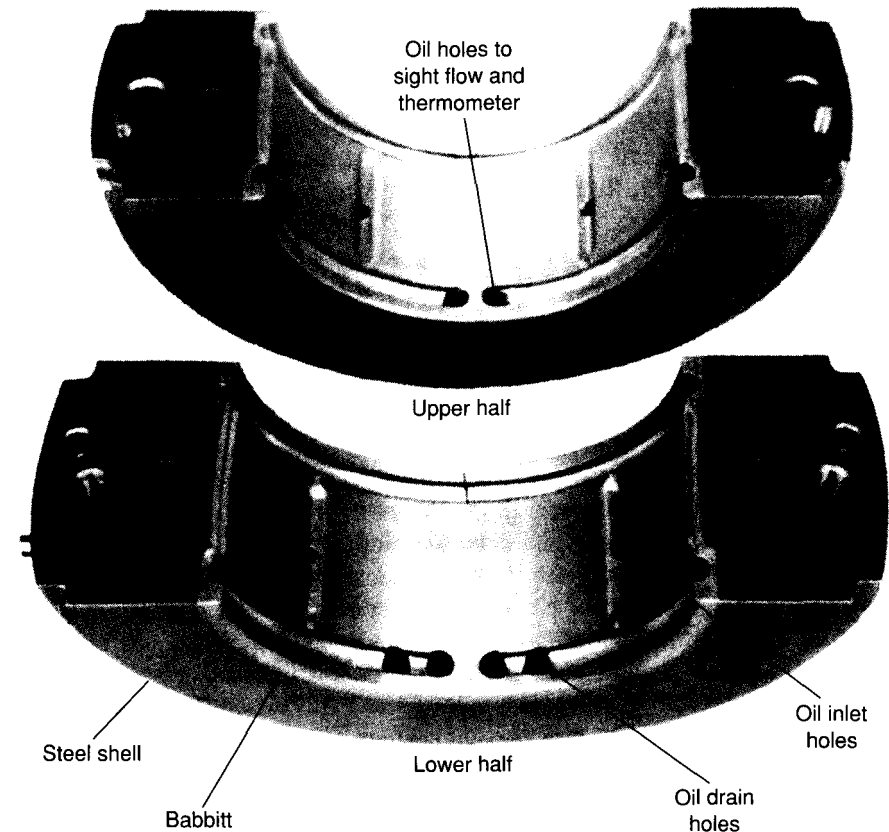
Typical marine steam turbine journal bearing with spherical seat for alignment. Courtesy General Electric Company.
